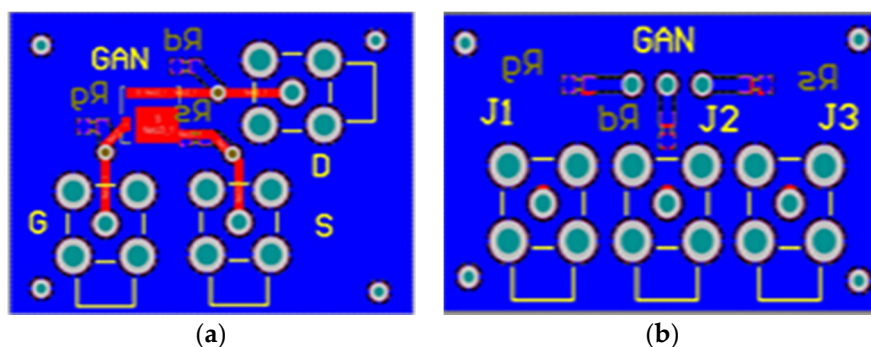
PCB designed for GaN device fixture for: (a) SMD packages; and (b) TO.
